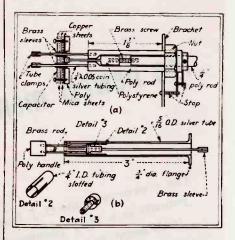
At (a) is shown the sliding capacitor and its mounting details.
